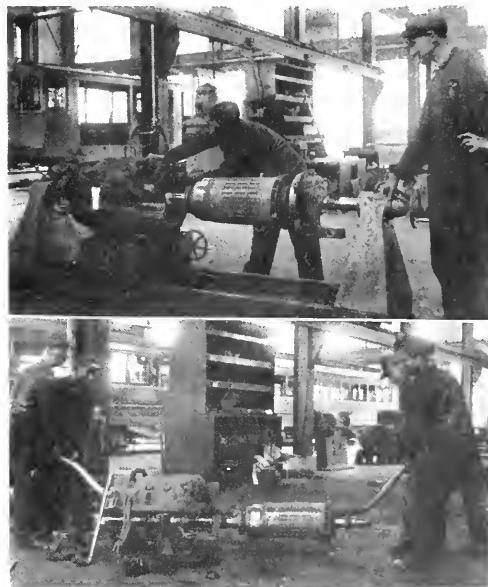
MACHINE AND HAND METHODS OF REMOVING ARMATURE FROM A BOX FRAME MOTOR
